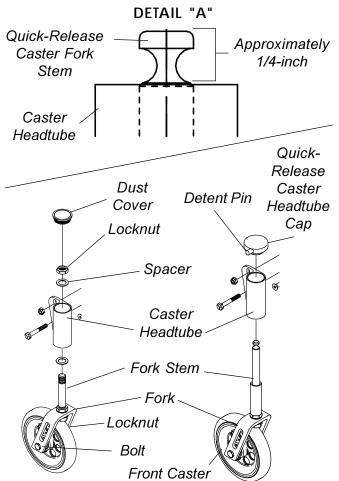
INSTALLING QUICK-RELEASE CASTERS
